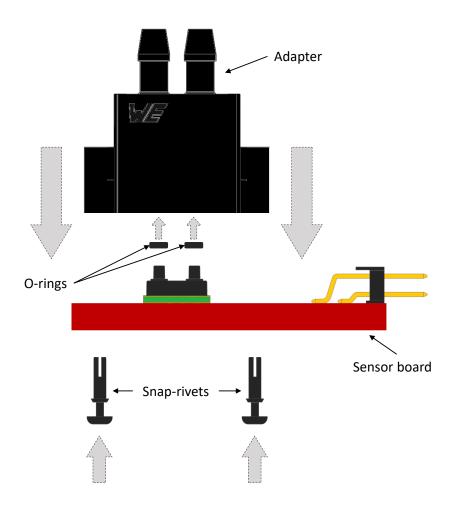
Assembly of the evaluation board (vertical straight nozzles)
